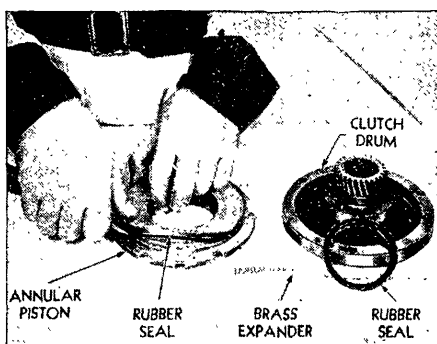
Remove rubber seals and brass expanders from annular piston and clutch drum piston, using blunt edge screw driver
